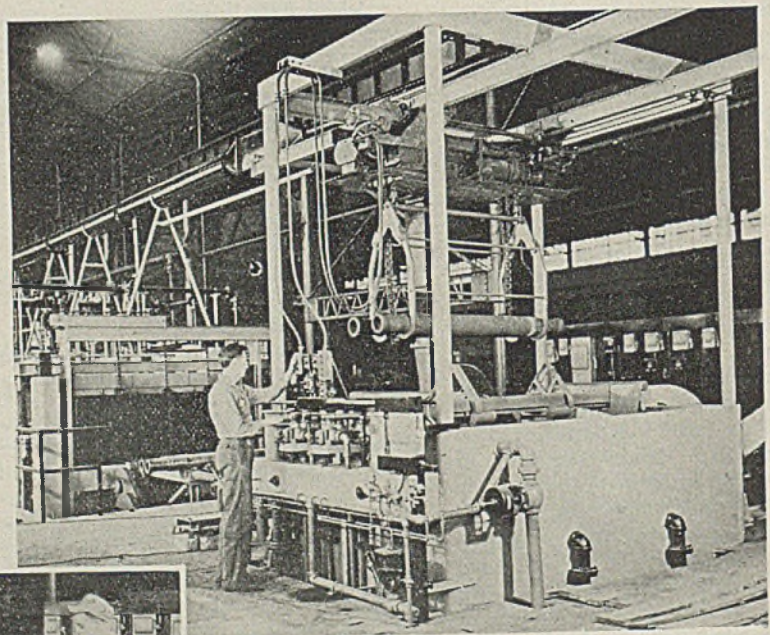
(Right)—Specially designed machine shown here straightens and quenches axles
